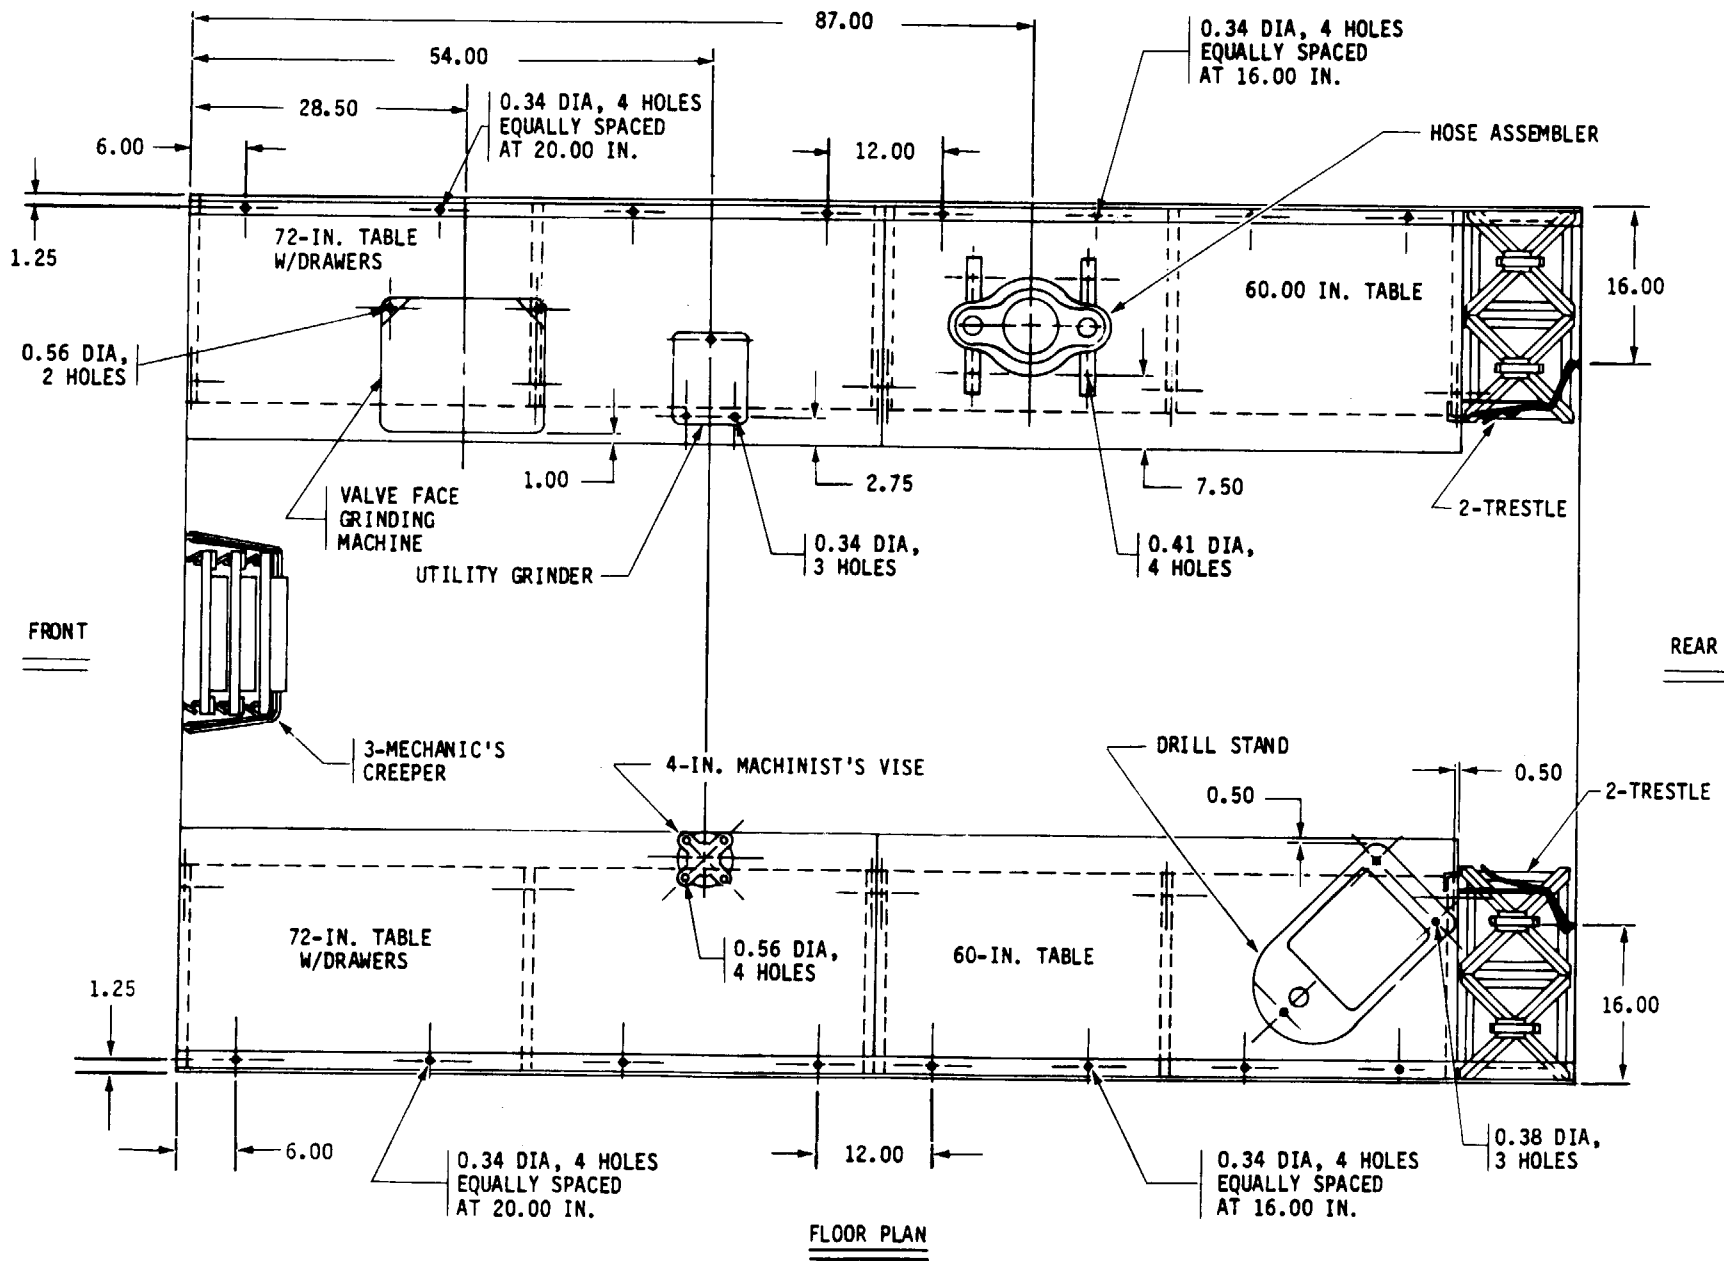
Components to be Mounted, Unit 1, M109A3, Floor Plan.
